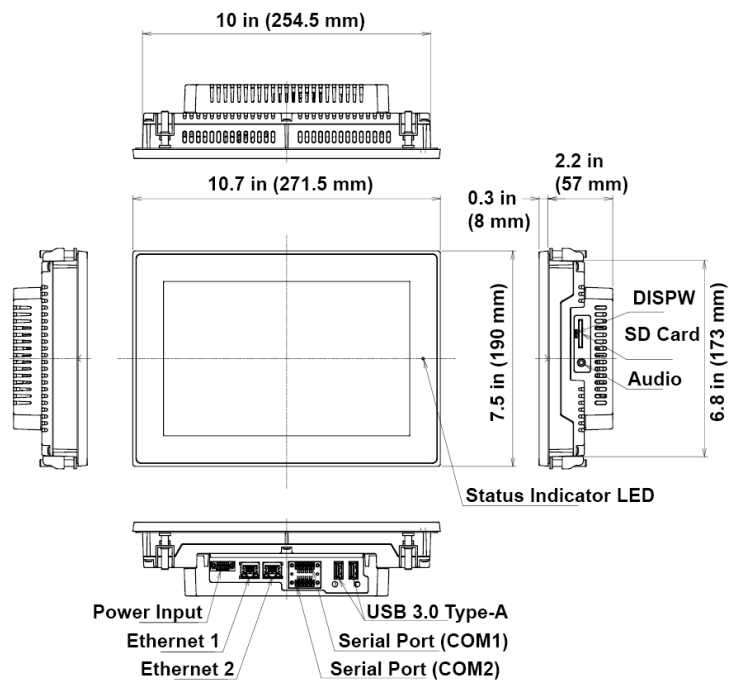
IC762CxS10Cxx Rear View and Dimensions
